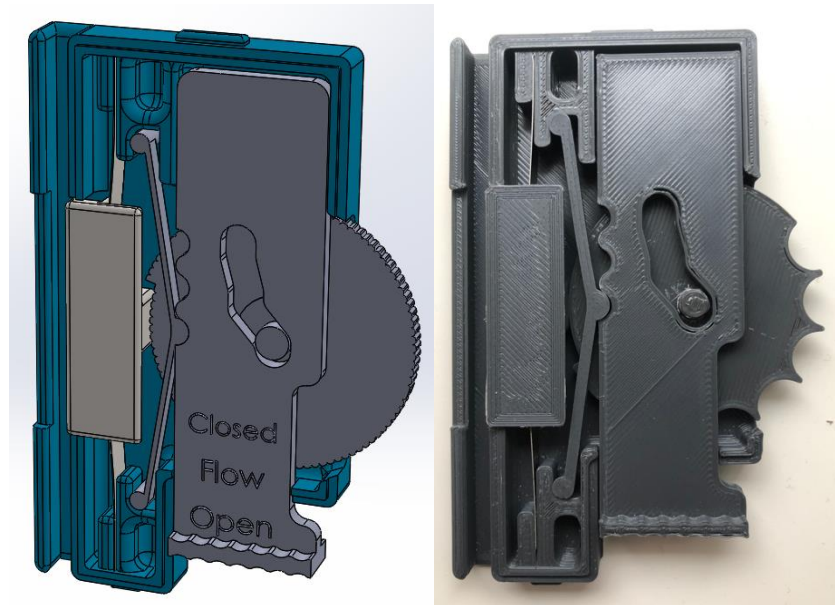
Frontal view of the DropAdjust v4 CAD model (left) and prototype (right). Shown without housing cap.
